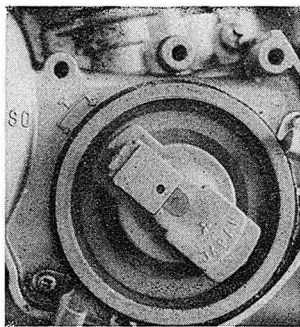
Finger on distributor must be between marks on cover with RIGHT piston at TDC.
